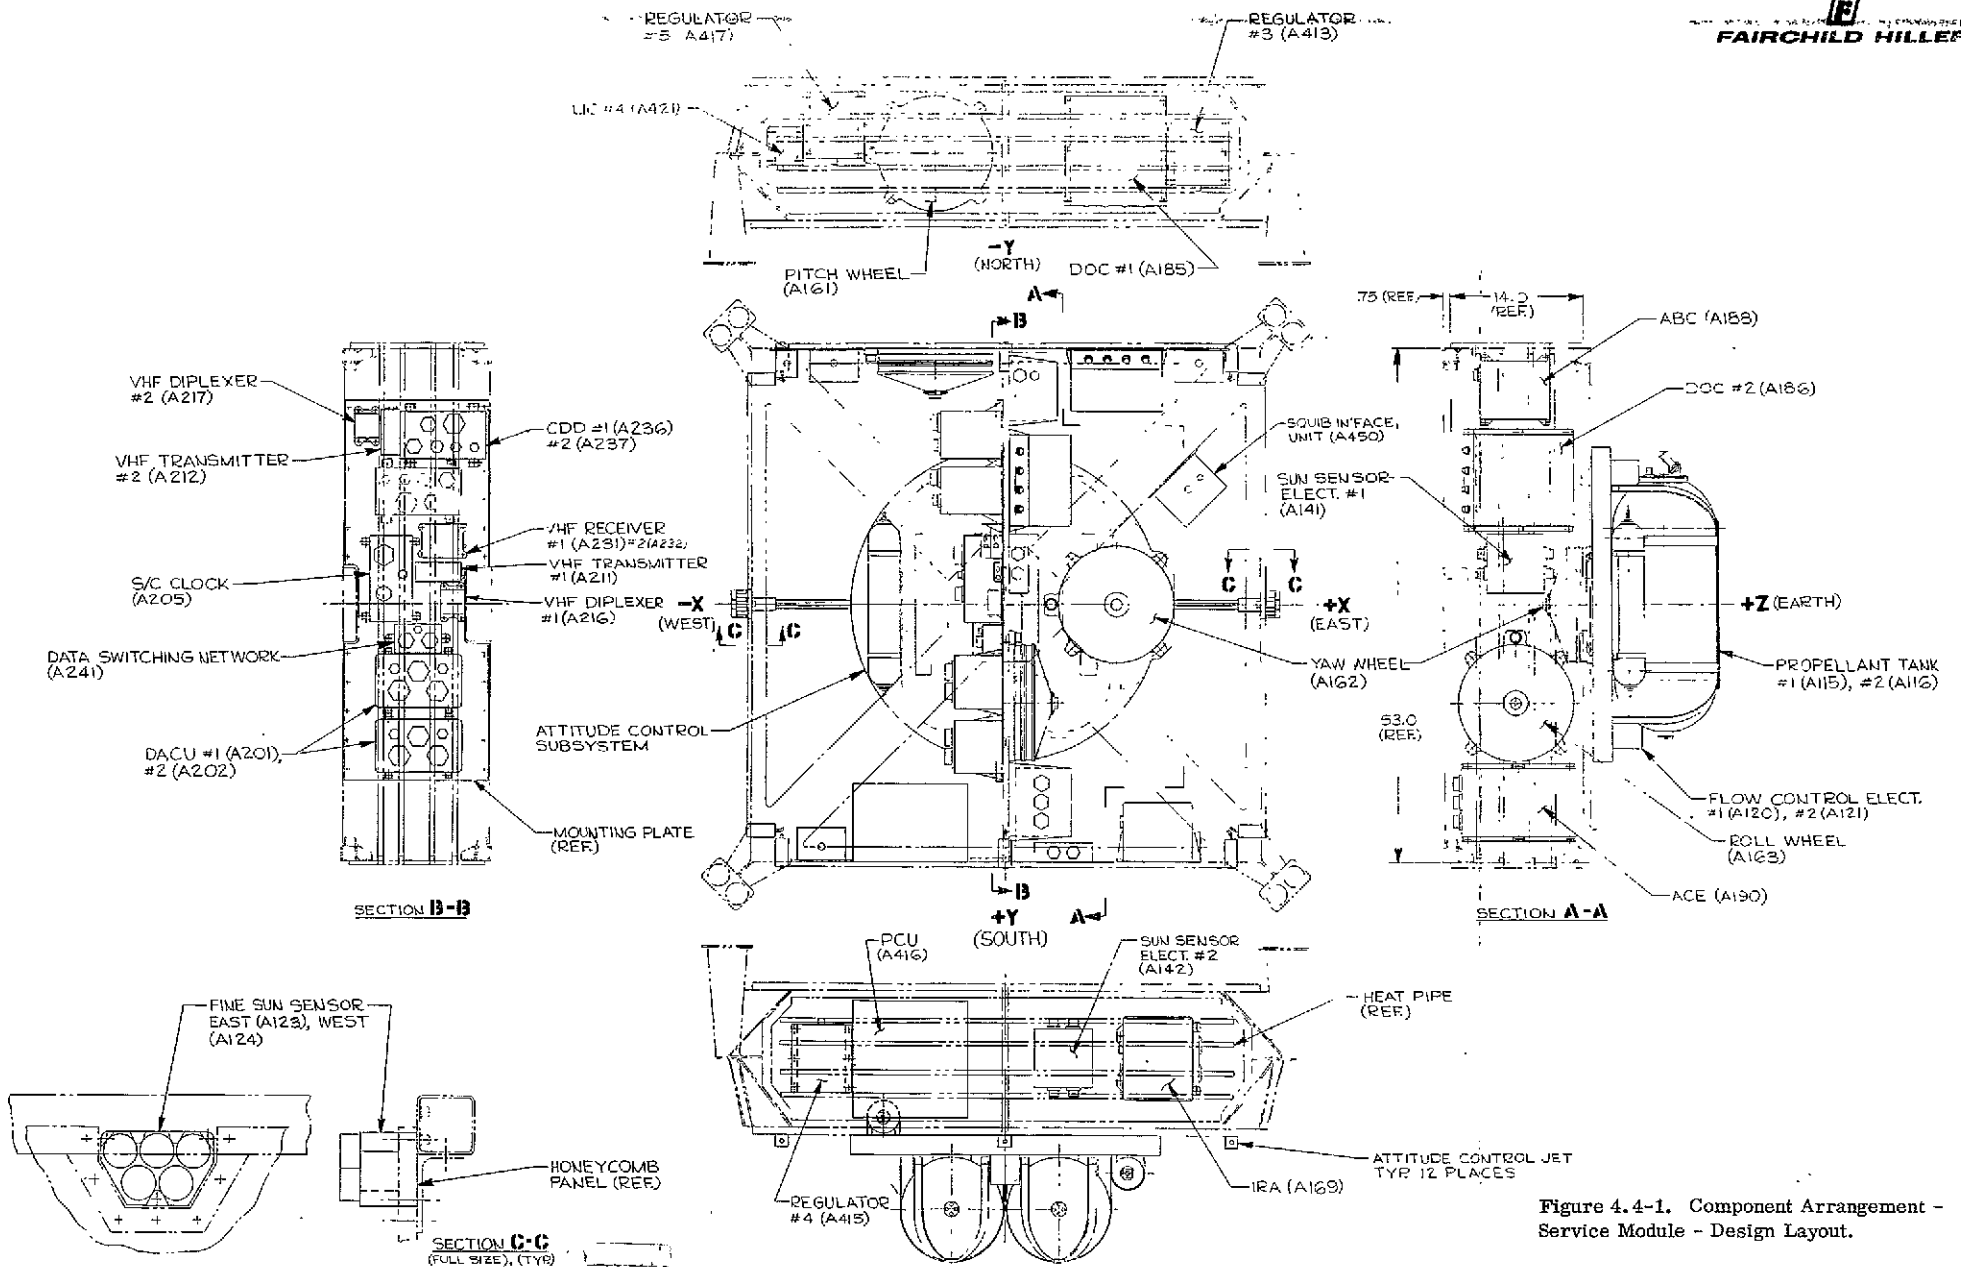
Component Arrangement - Service Module - Design Layout.
